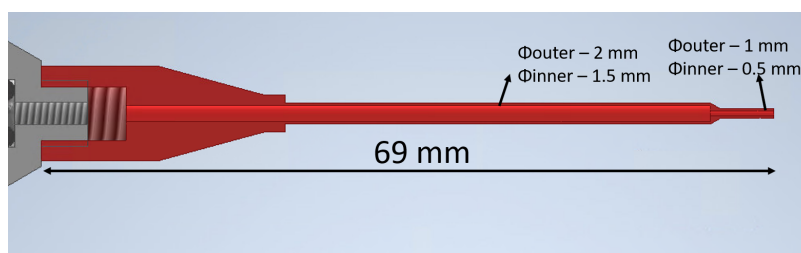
CAD drawing of the original GIS needle assembly showing the different dimensions.
